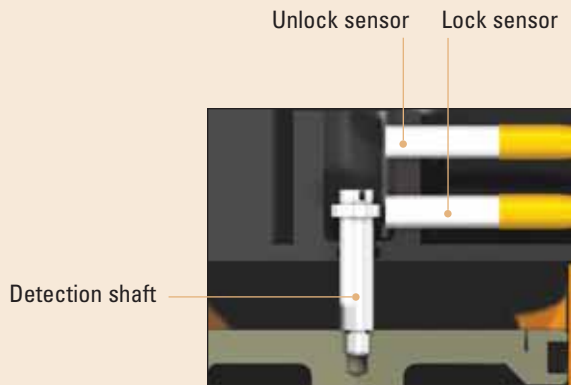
Close-up of SIP in Lock position with the Tool plate. Lock sensor activated by the detection shaft.
